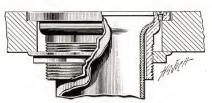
Sectional view of Plates W-1702 and W-1704
